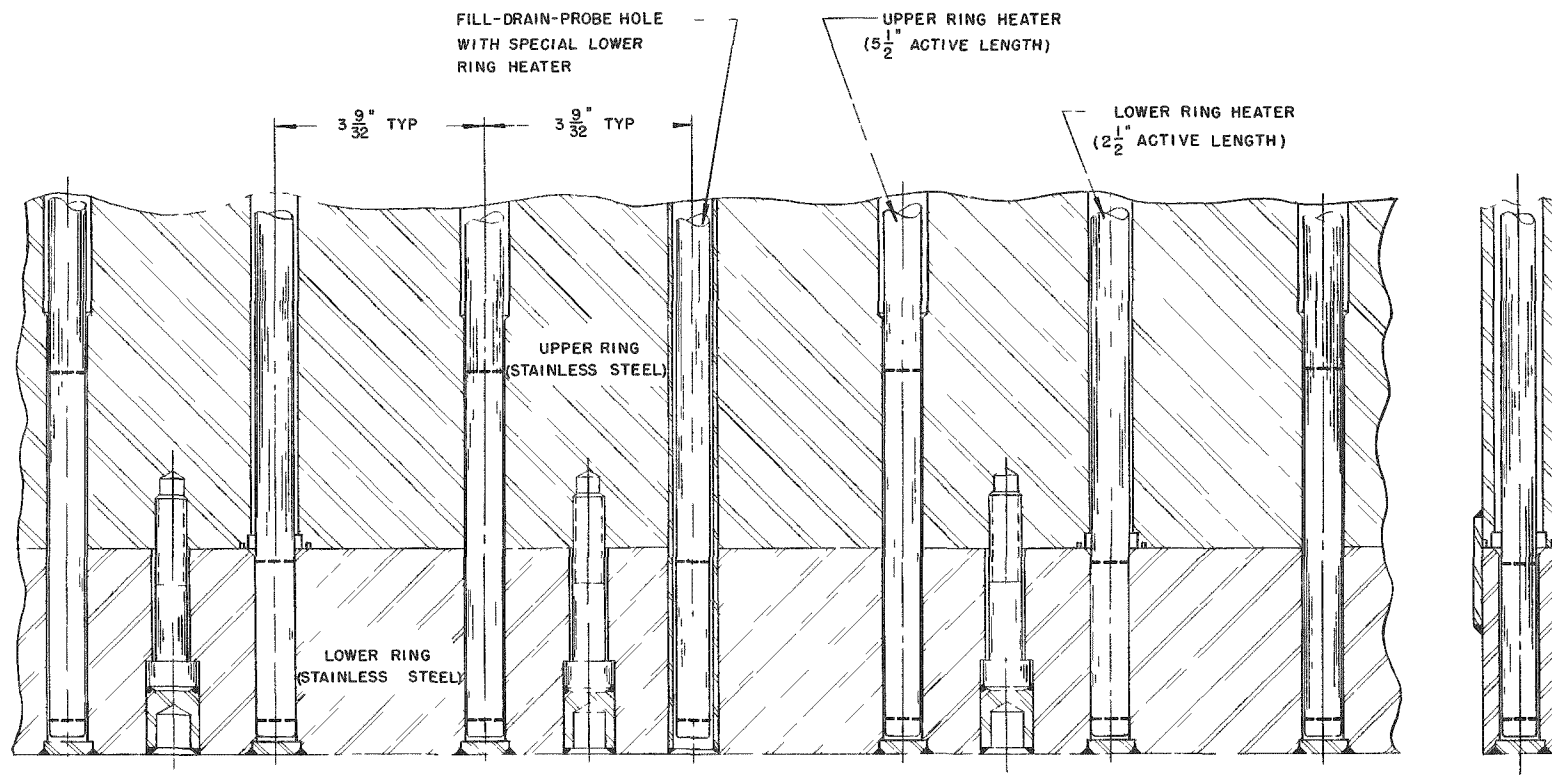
Arrangement of Seal Blade Upper and Lower Rings (Revised)
